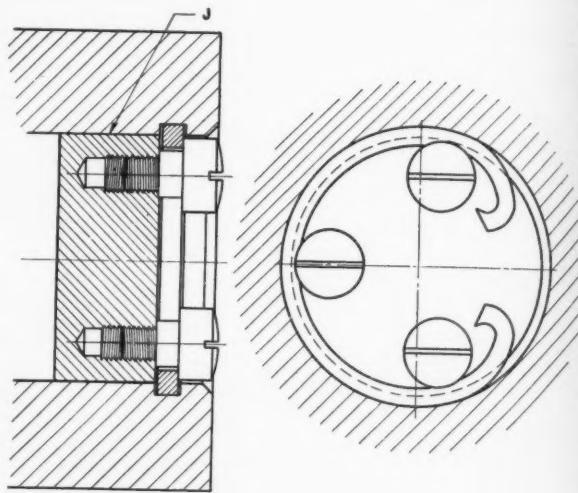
Fillister head screws tapped into plug provide a third alternative for snap ring locking. Special screw shank is flush with plug; head does not clamp the ring
